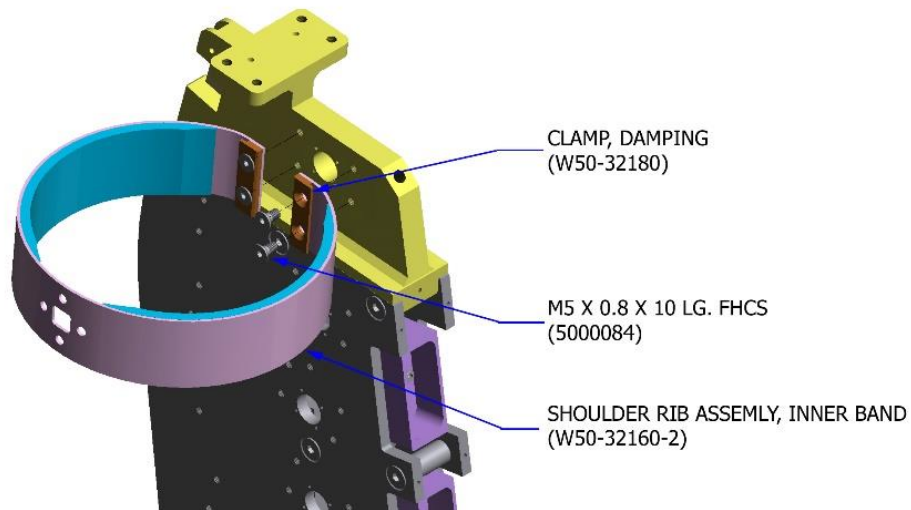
Assembling the inner shoulder rib assembly on non-struck side.
